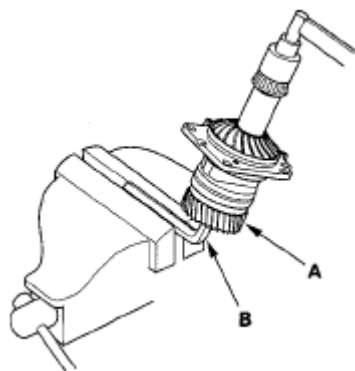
Identifying Transfer Shaft Assembly And Hex Wrench
